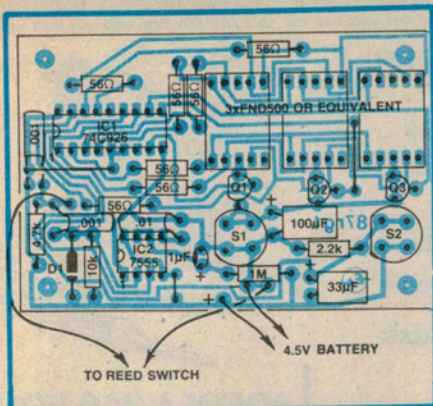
parts layout for the PCB. Don't forget the three wire links and take care when installing the polarised components.
